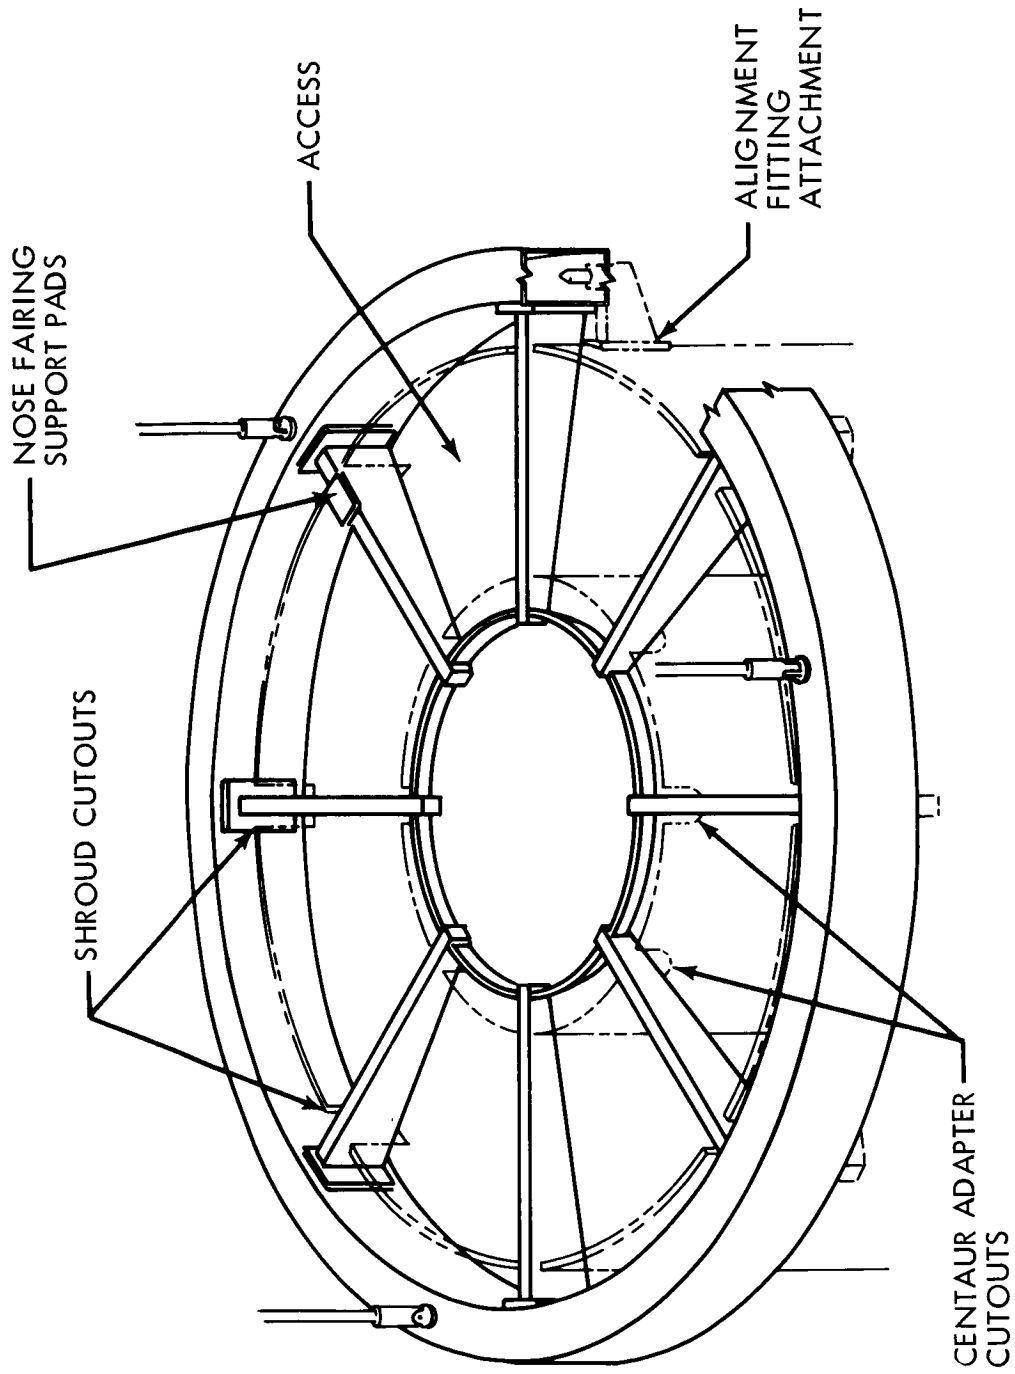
Possible Launch Vehicle Interfaces with Handling Fixture
